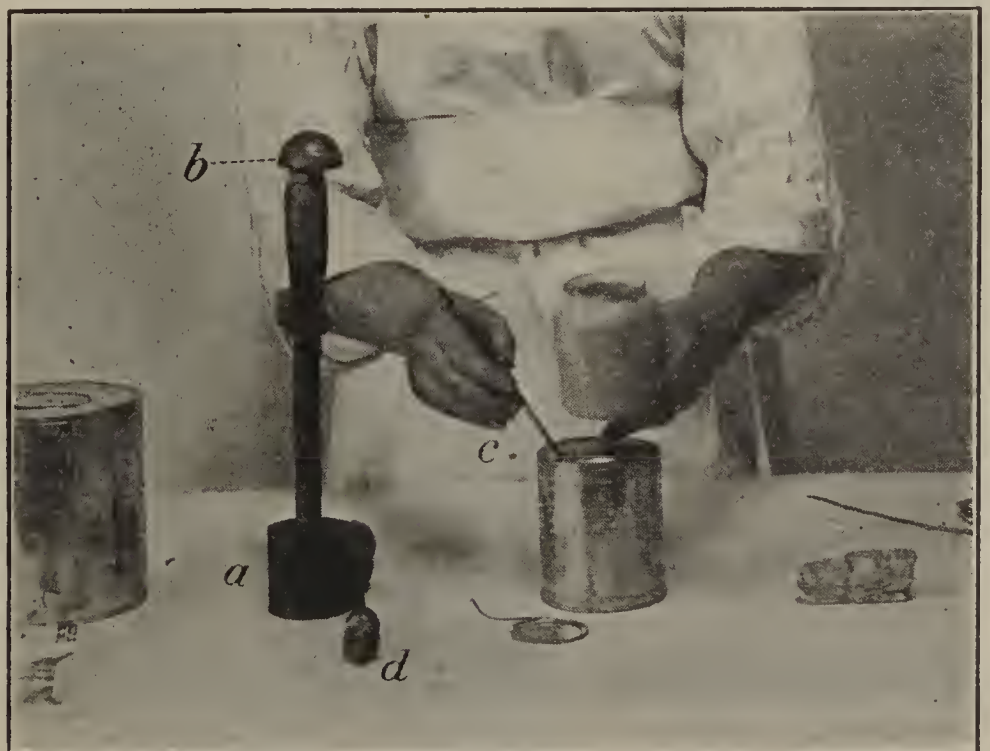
Applying the flux, the first step in soldering tin cans: *a*, Capping iron; *b*, head of inner upright steel; *c*, proper position of brush while stroking rim of cap with flux; *d*, tipping copper or soldering iron.
